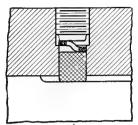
A lock washer under the hollow headless screw locks both the screw and plug in place.
